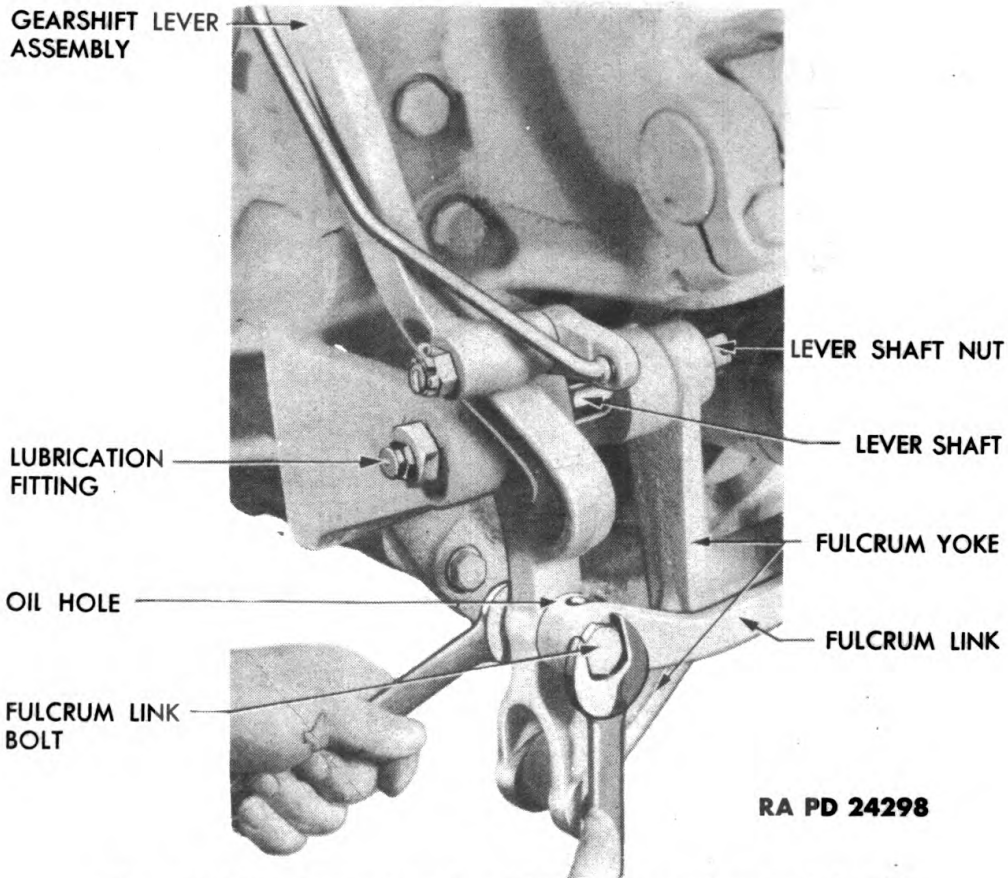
Removing Gearshift Lever Fulcrum Link Bolt
